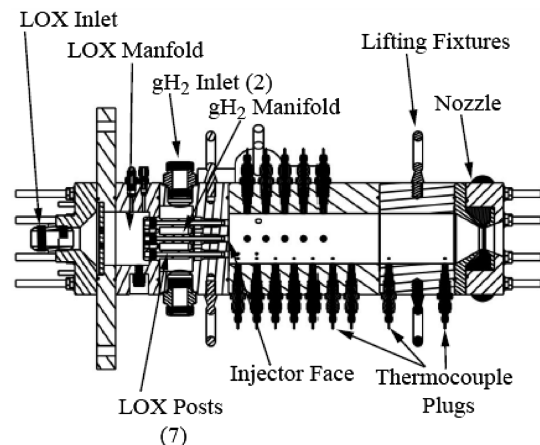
Cutaway view of the combustion chamber and seven-element injector. The chamber length and diameter are 12 and 2.66 in., respectively. Forty-one pairs of coaxial thermocouples were installed in plugs in the chamber wall upstream of the convergent section. Three thermocouple pairs were press-fit into the injector face.  $P_c$  was varied from 300 to 1000 psia and mixture ratio varied from 3 to 6. The chamber, injector, and nozzle were fabricated from OFHC copper. The LOX posts and mounting hardware were fabricated from type 304 stainless steel.
